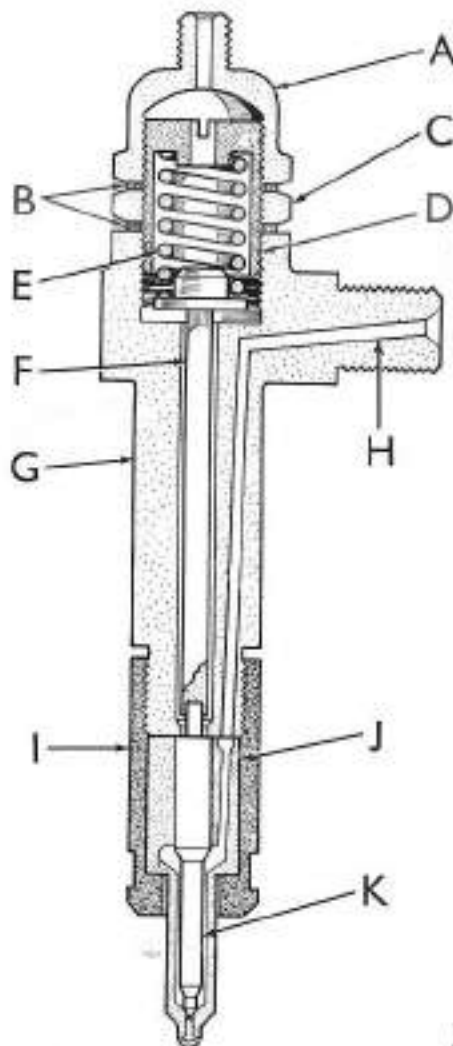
Cross-sectional view of injector assembly. Refer to Fig. 68 for exploded view and legend.
